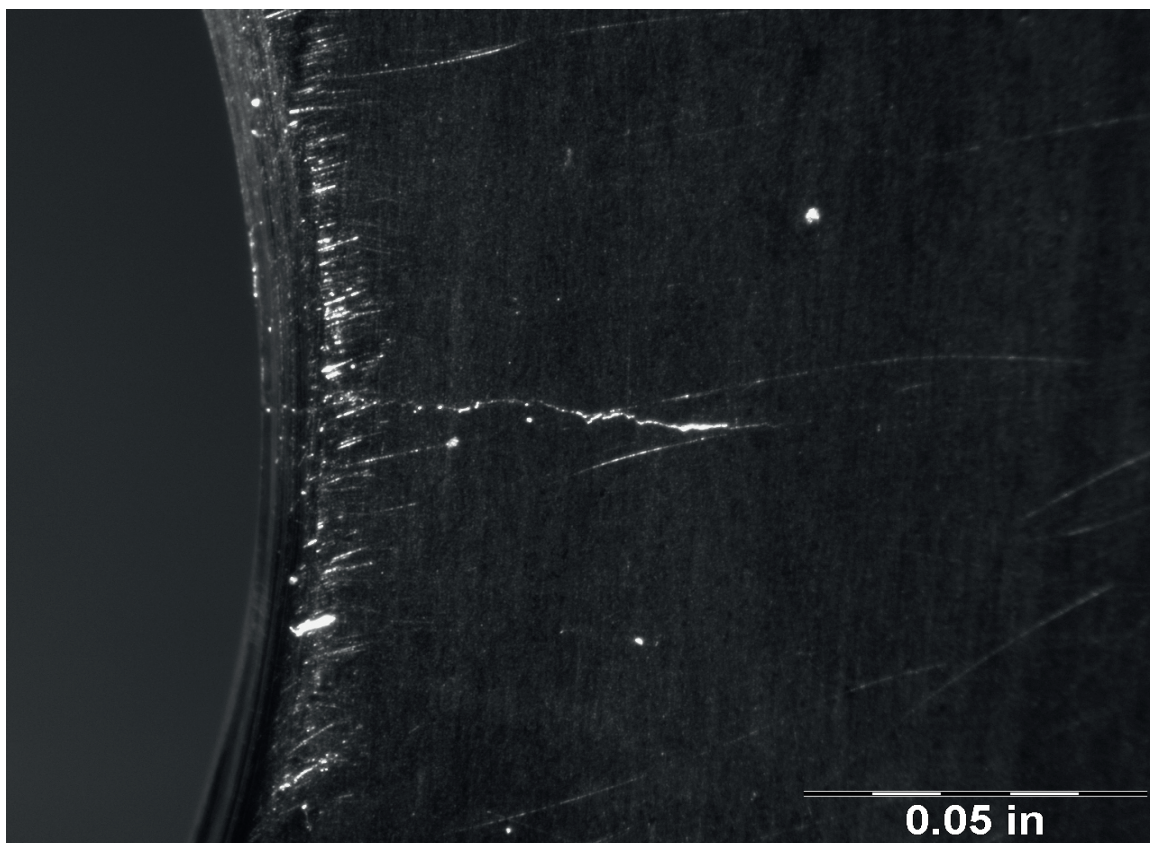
Image of Surface Crack in Coupon Cx4N1-02-B, Surface Crack Length is 0.0798 inch.
